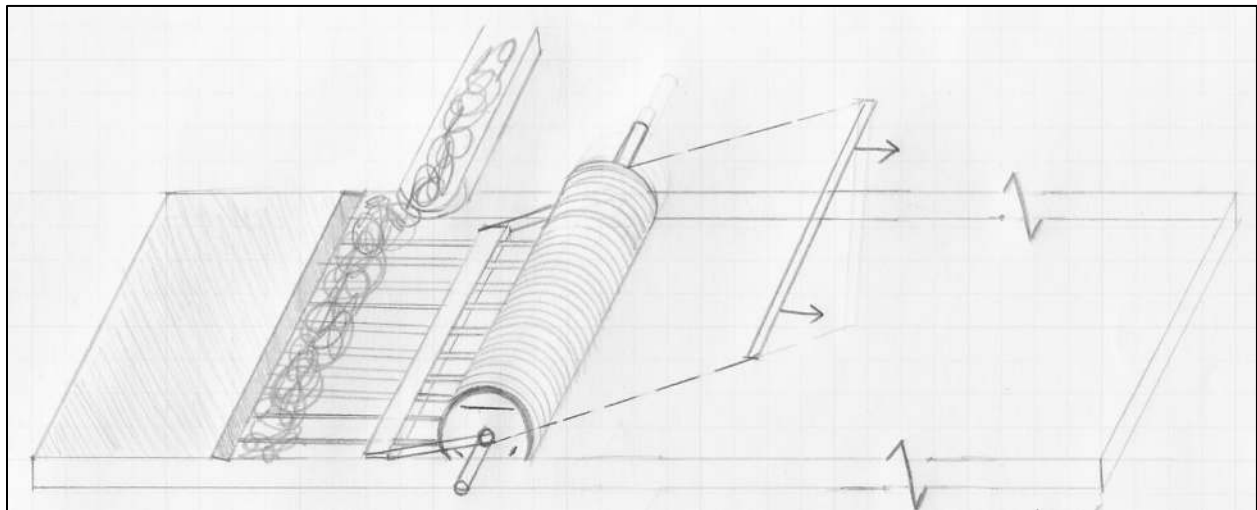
Improved concept for rollout and tube stabilization with spacer rake and arms attached to the spool assembly.
